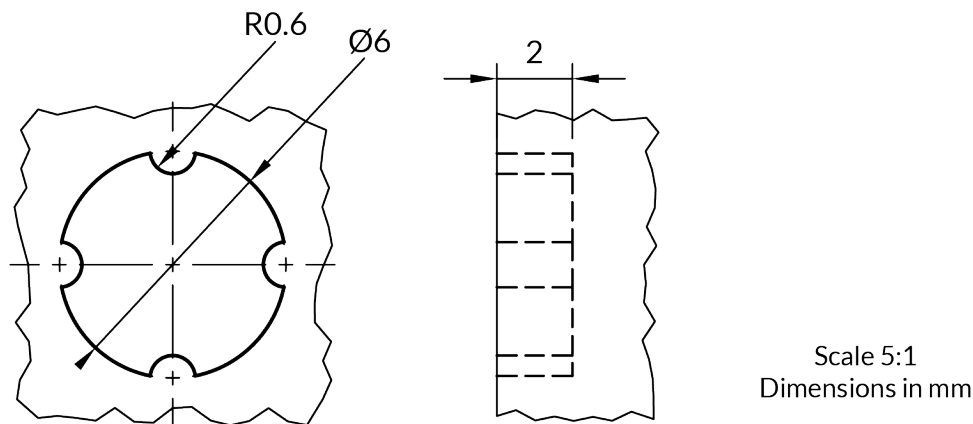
A technical drawing of the redesigned female 3D printed interface
